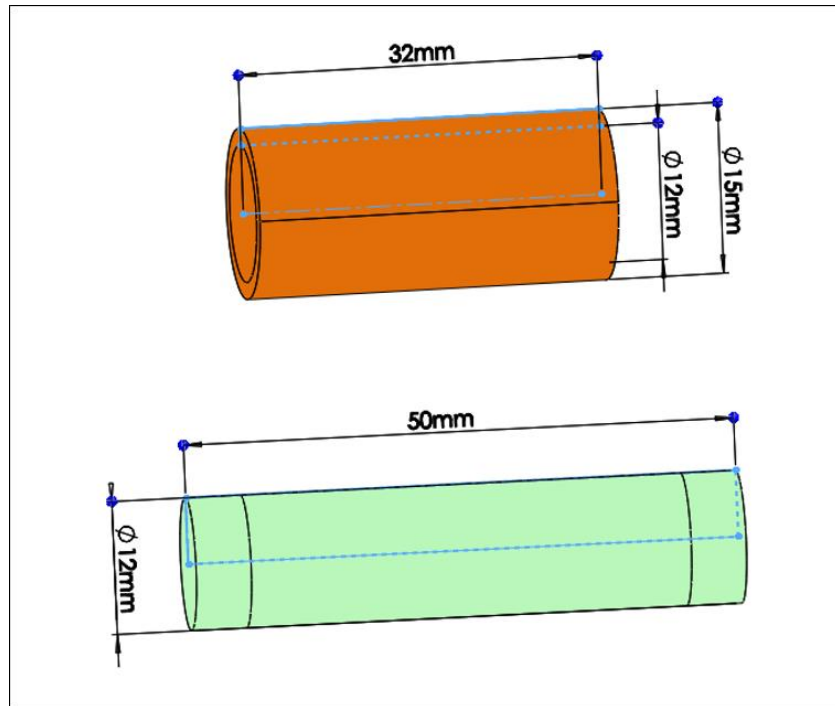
, Journal Bearing and Shaft 3D CAD Models
